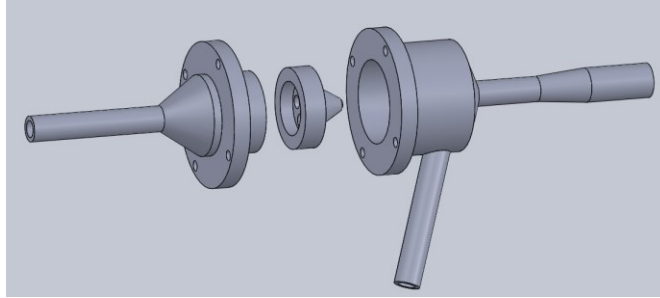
Disassembled multi-nozzle ejector CAD model.
